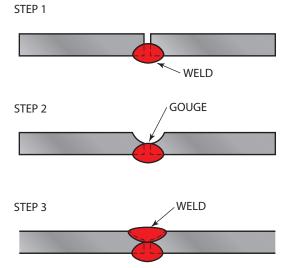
Back gouging sequence for a weld to ensure 100% joint penetration.
